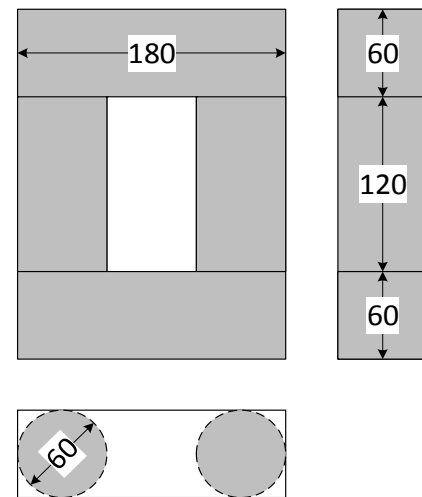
Dimensions (in millimeters) of the magnetic core used to perform the limiter.
